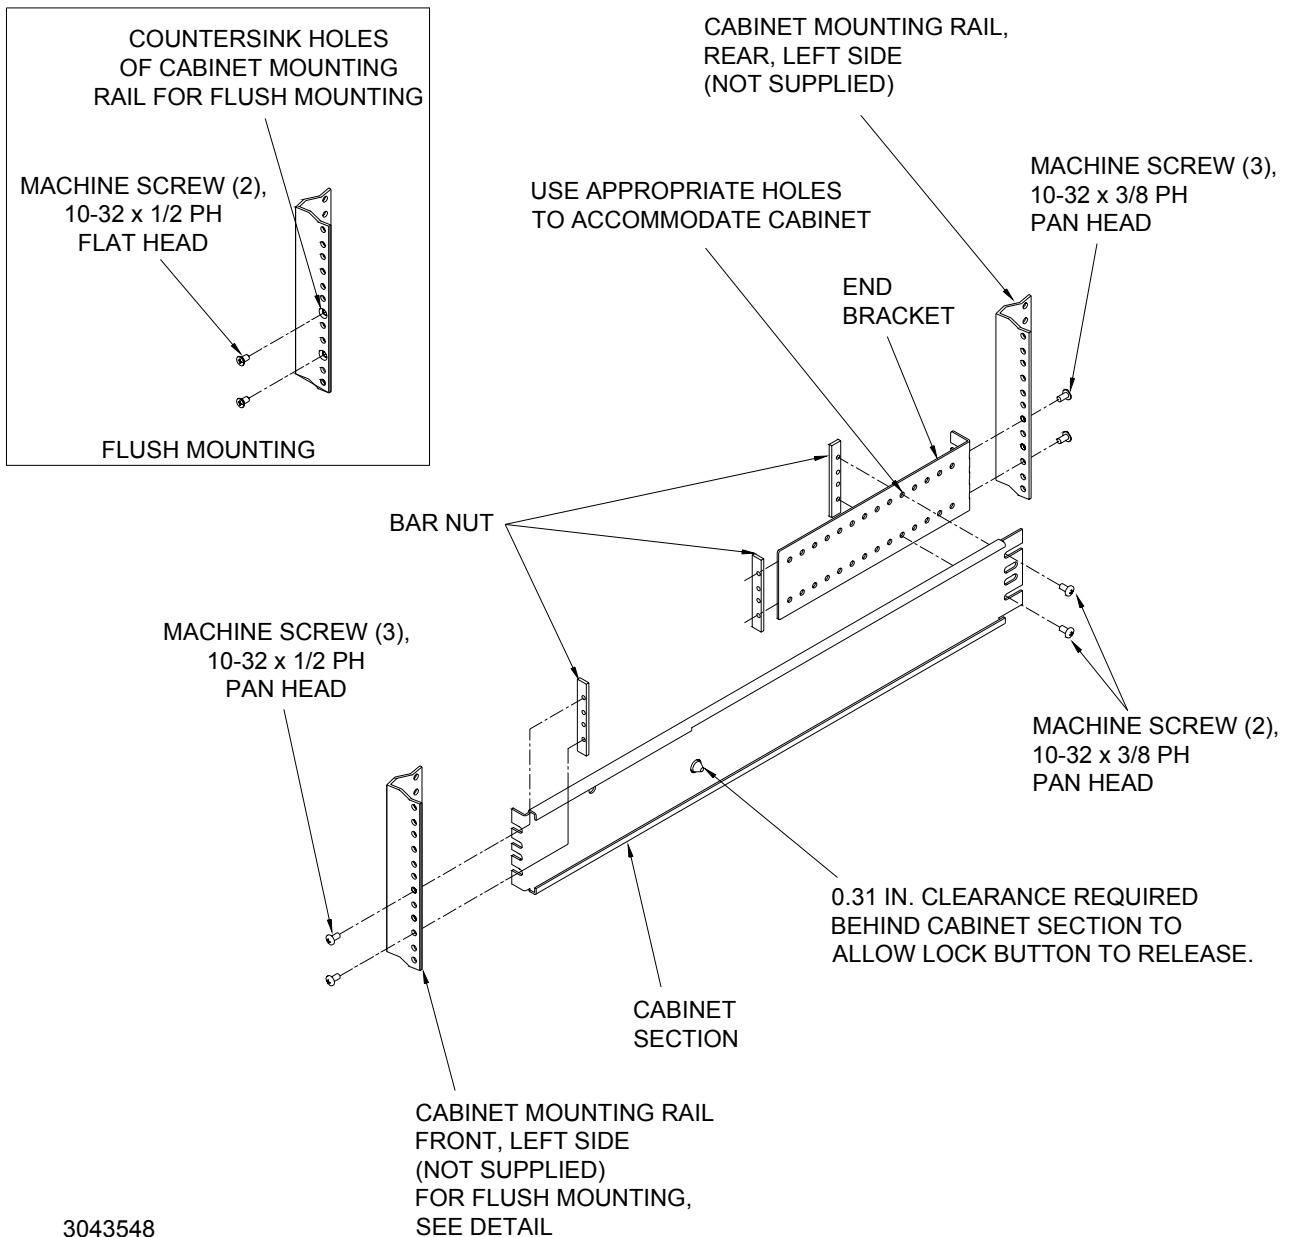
ATTACHING END BRACKETS AND CABINET MOUNTING RAILS TO CABINET SECTION
